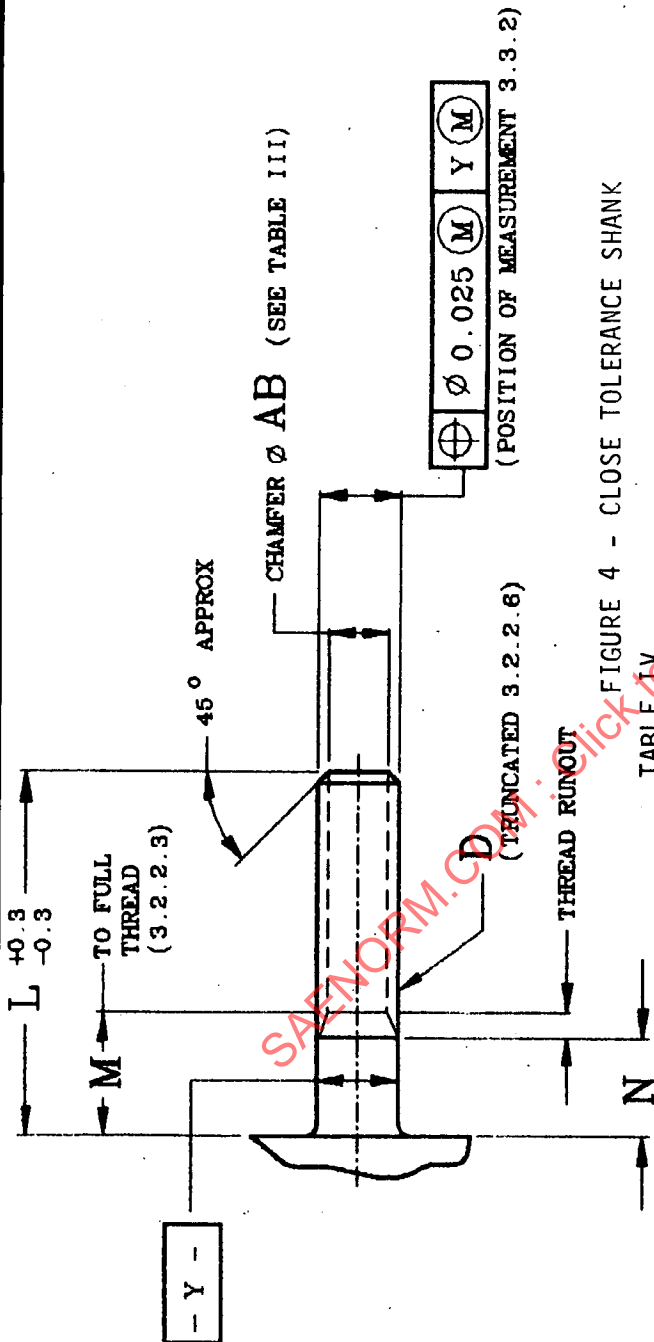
CLOSE TOLERANCE SHANK
